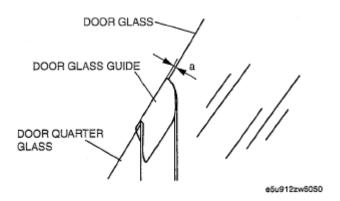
Identifying Door Glass, Door Glass Guide With Clearance Courtesy of MAZDA MOTORS CORP.
